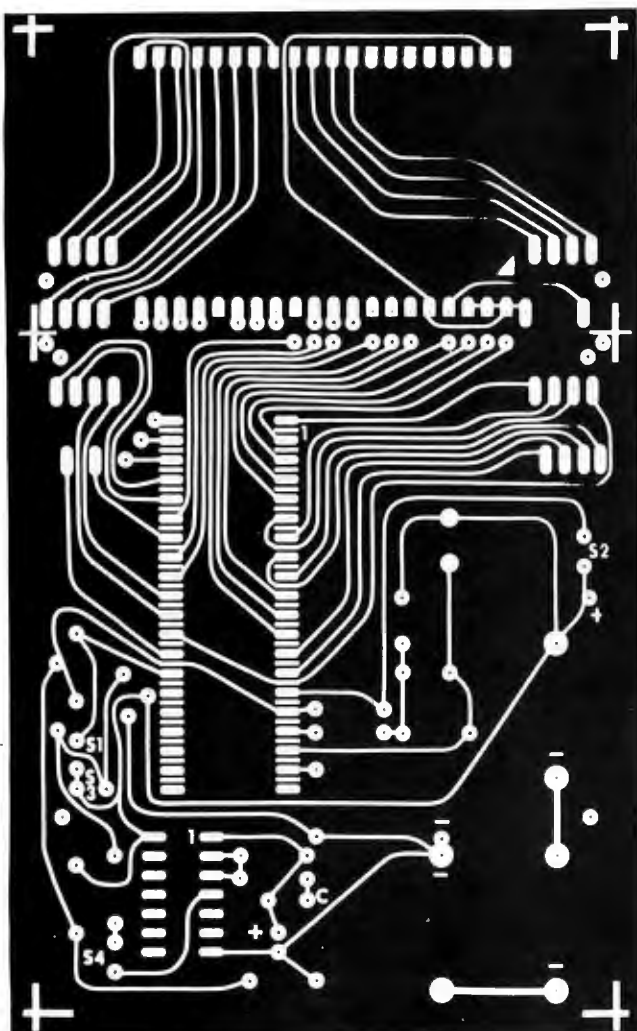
Actual-size foil pattern for the clock main and display board is at left. Component layout is shown above. After completing the board, carefully separate the two parts.
